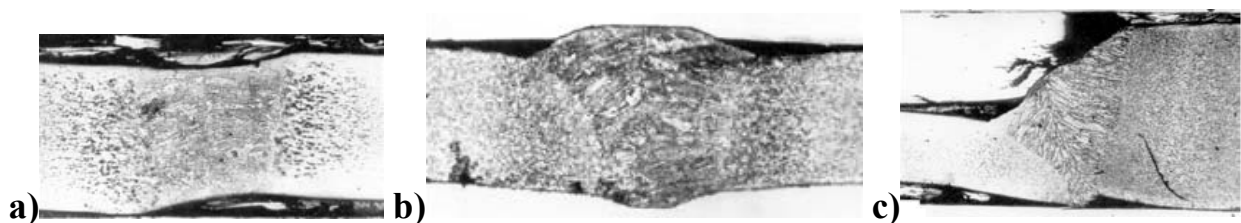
Structures of welded joints of carbon steel ($\delta=0.8$ mm), made by laser welding [18]: a) – short-focus optics ensured welding speed $V=540$ m/h b) – filler wire $\varnothing 0.8$ mm improved weld formation at $V=420$ m/h; c) – multi-thickness ($\delta = 0.8$ and 2.0 mm) joint at $V=240$ m/h.
